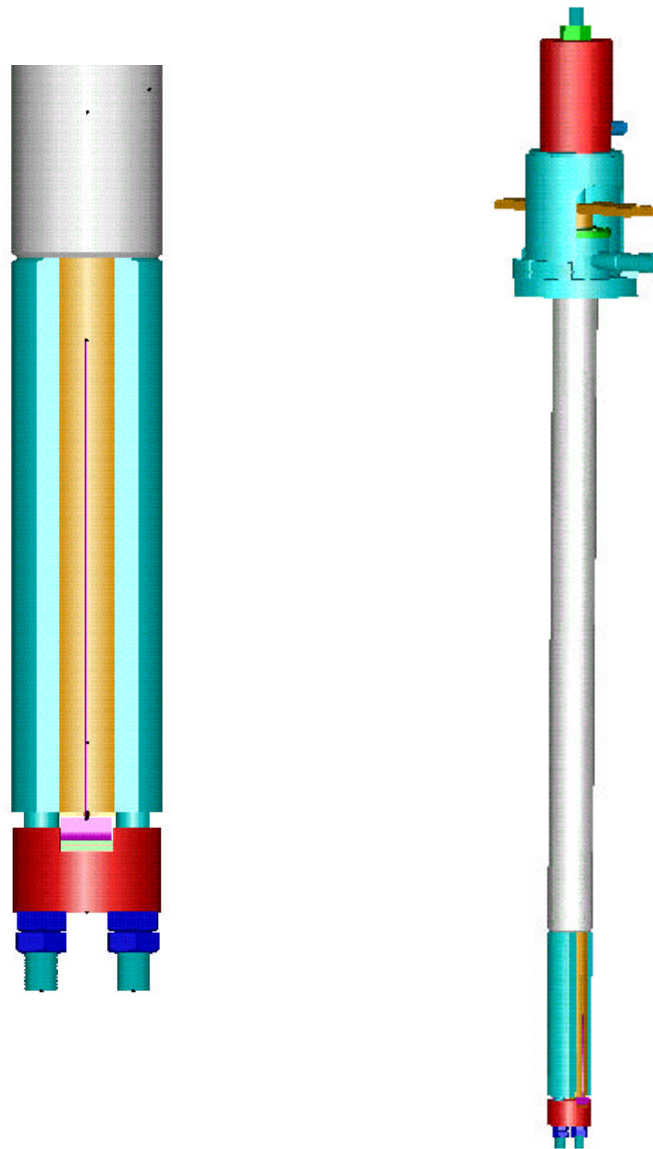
Fixture assembly design after mechanical and thermal analyses.
